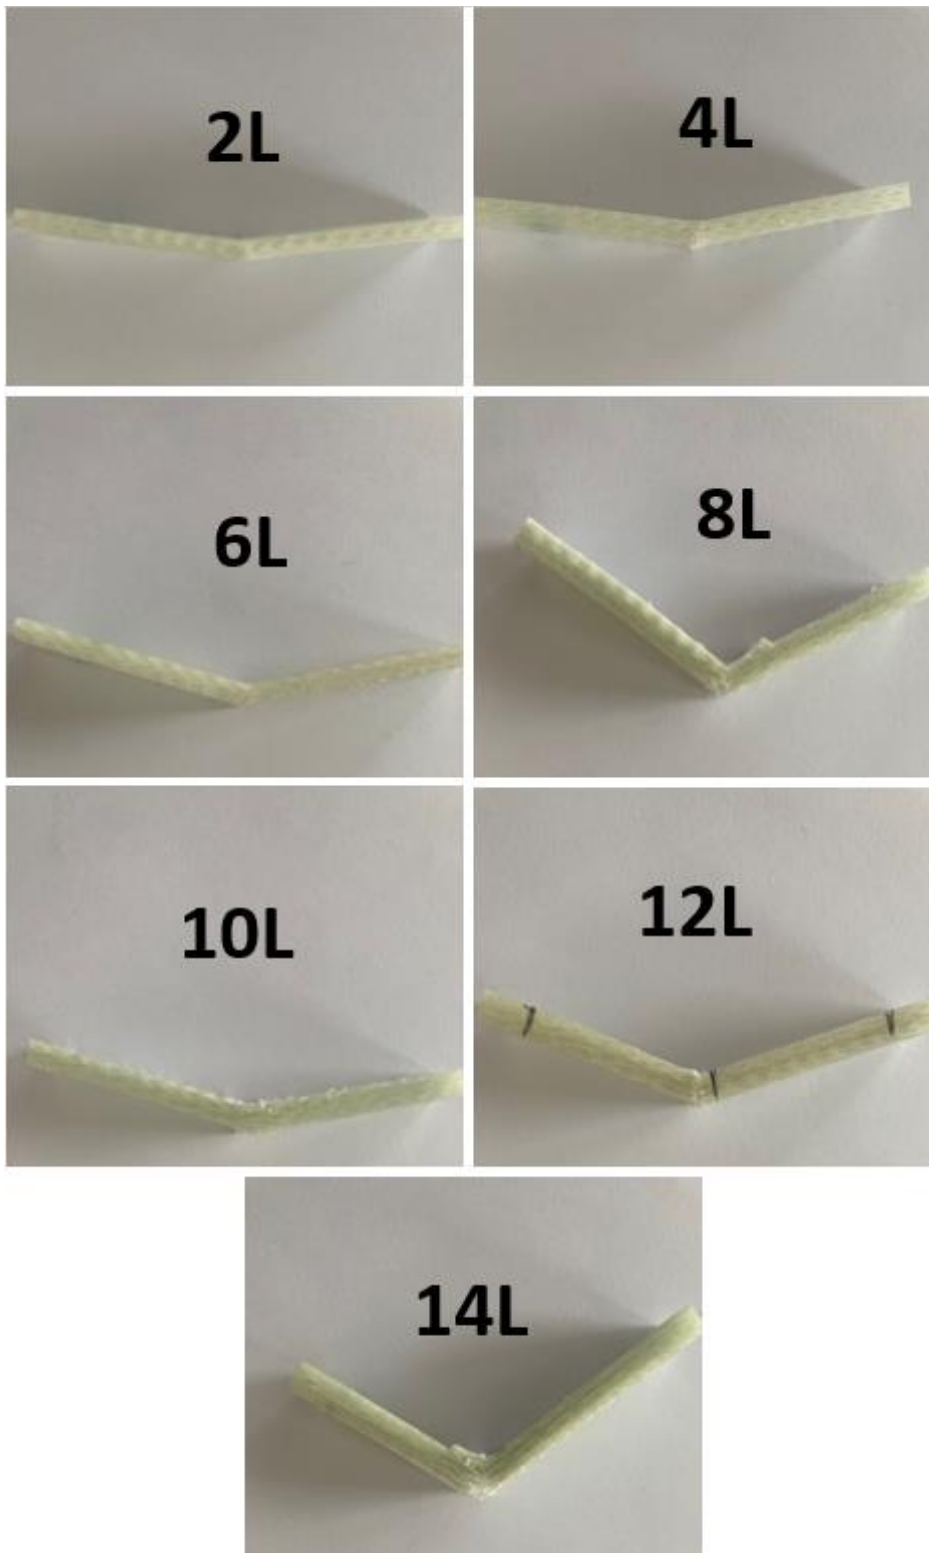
Photographic images showing general flexural failure modes of PLA/GF laminate specimens
